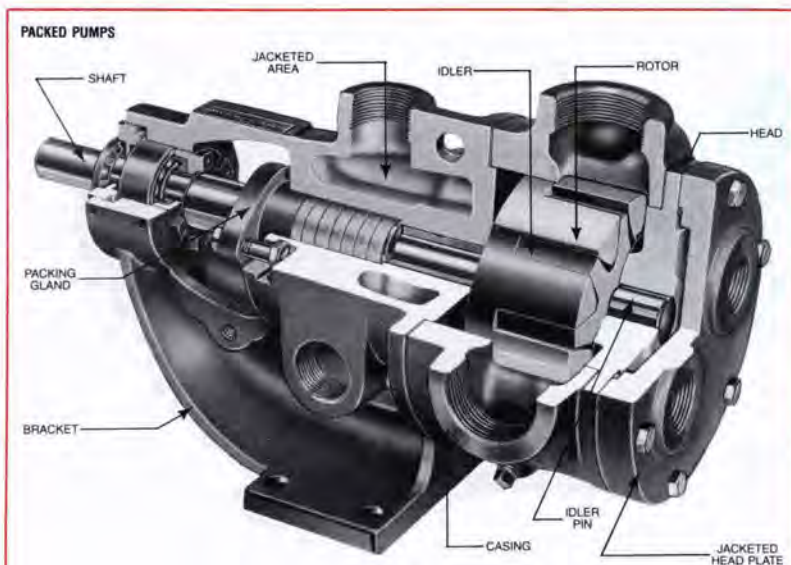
Series 225 fully jacketed pump for heating or cooling the environment.
